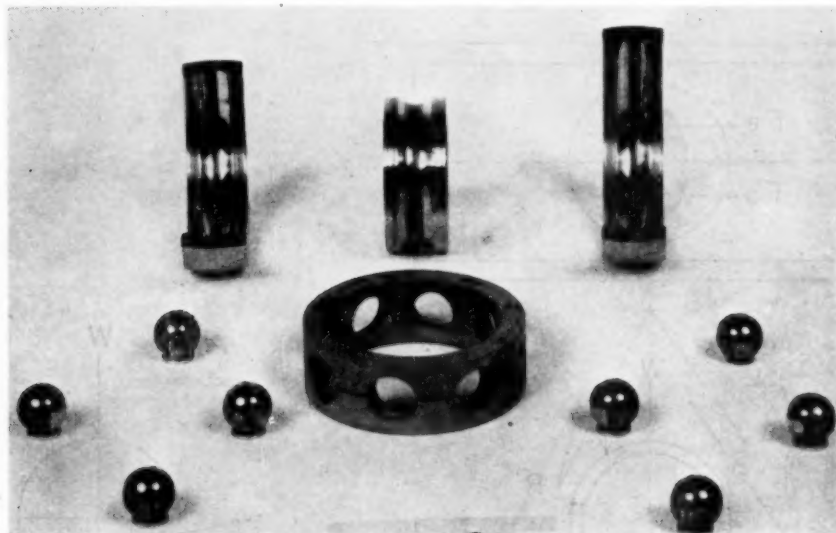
BEARING PARTS AFTER PARTIAL FAILURE
